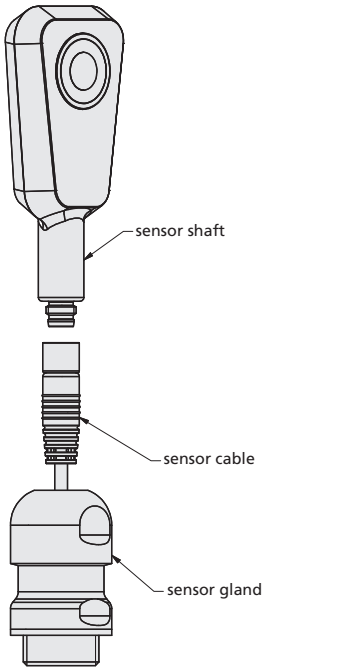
Mounting of pms sensor with sensor screw connection BF-pms/A1
